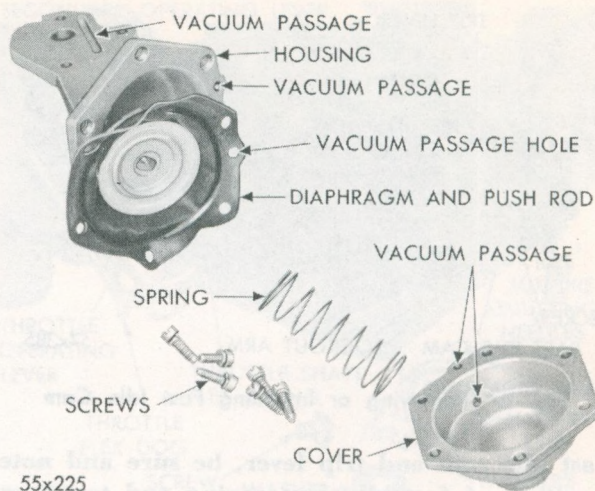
Vacuum Diaphragm Assembly (Disassembled View)
